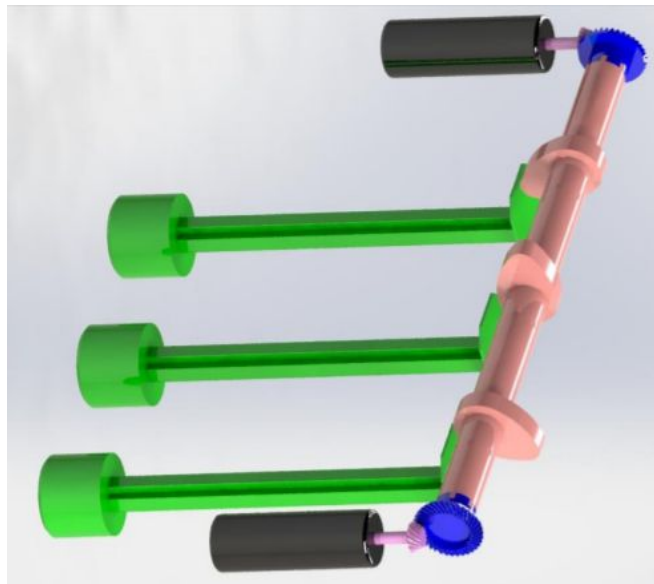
Isometric view of camshaft mechanism without denture. Reproduced as is from [27].
